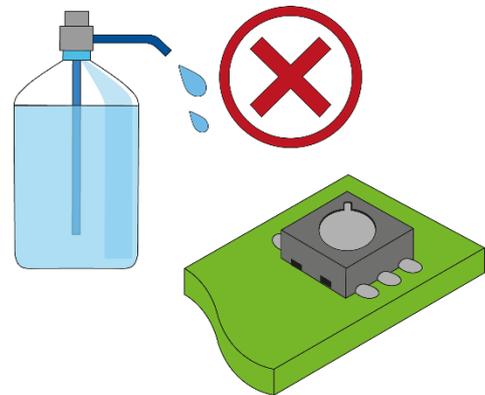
Do not apply board wash to PCBs containing SGPxx sensors.
